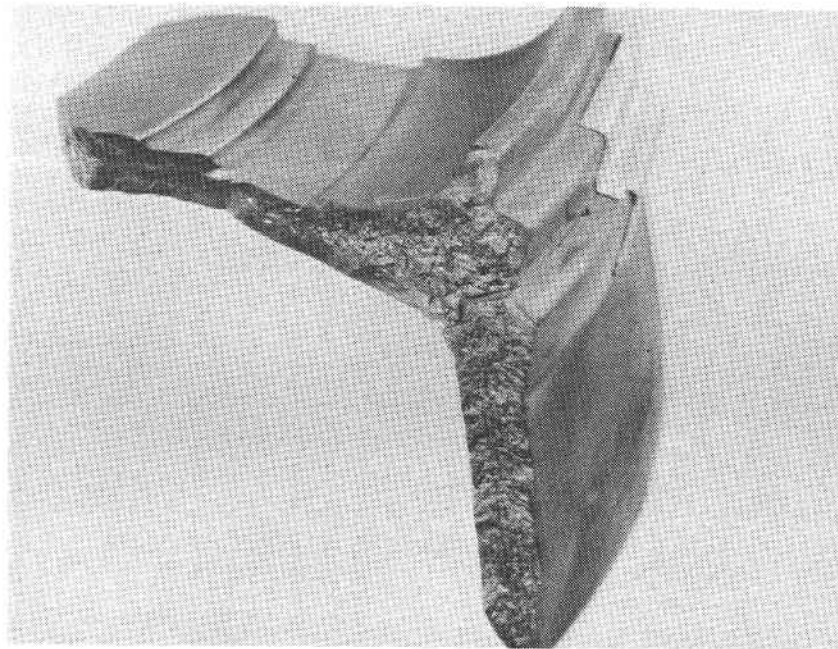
Exaggerated Grain Growth on Fracture Surface
